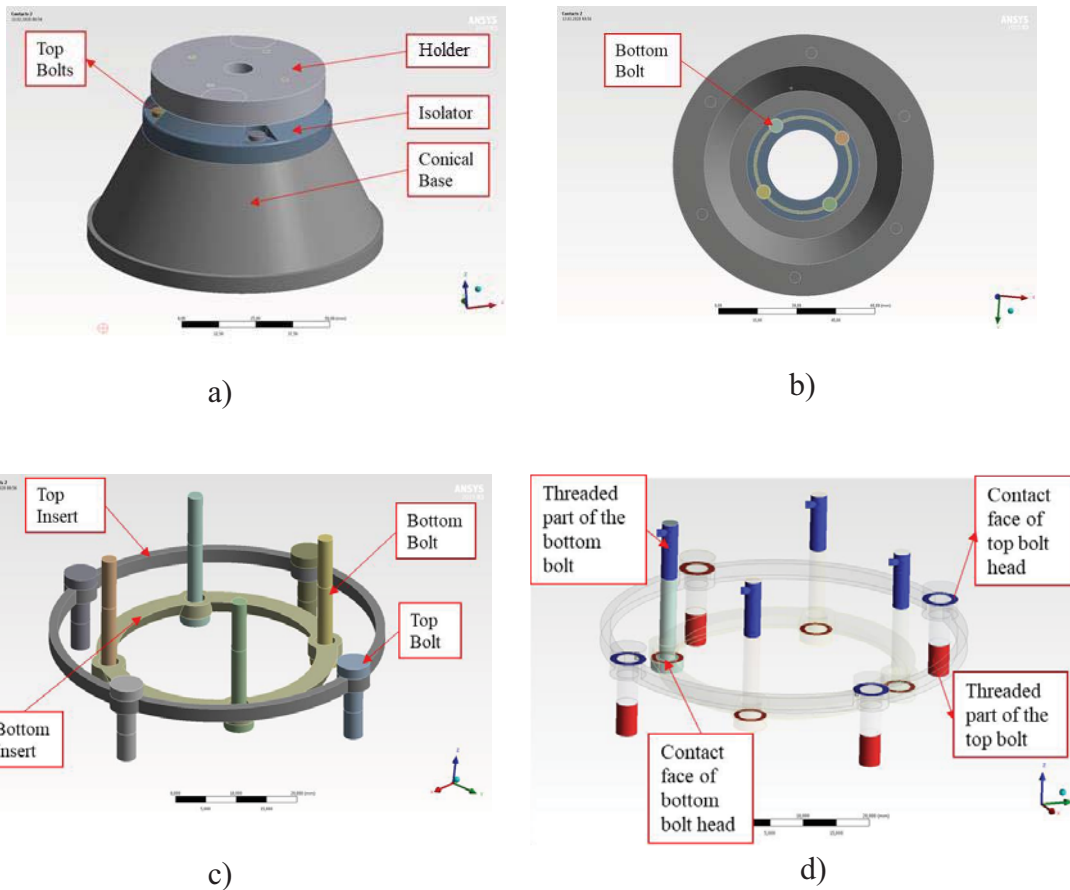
Solid Bolt Model: a) Assembly; b) bottom view; c) bolts and inserts; d) bonded contact surfaces on bolts
